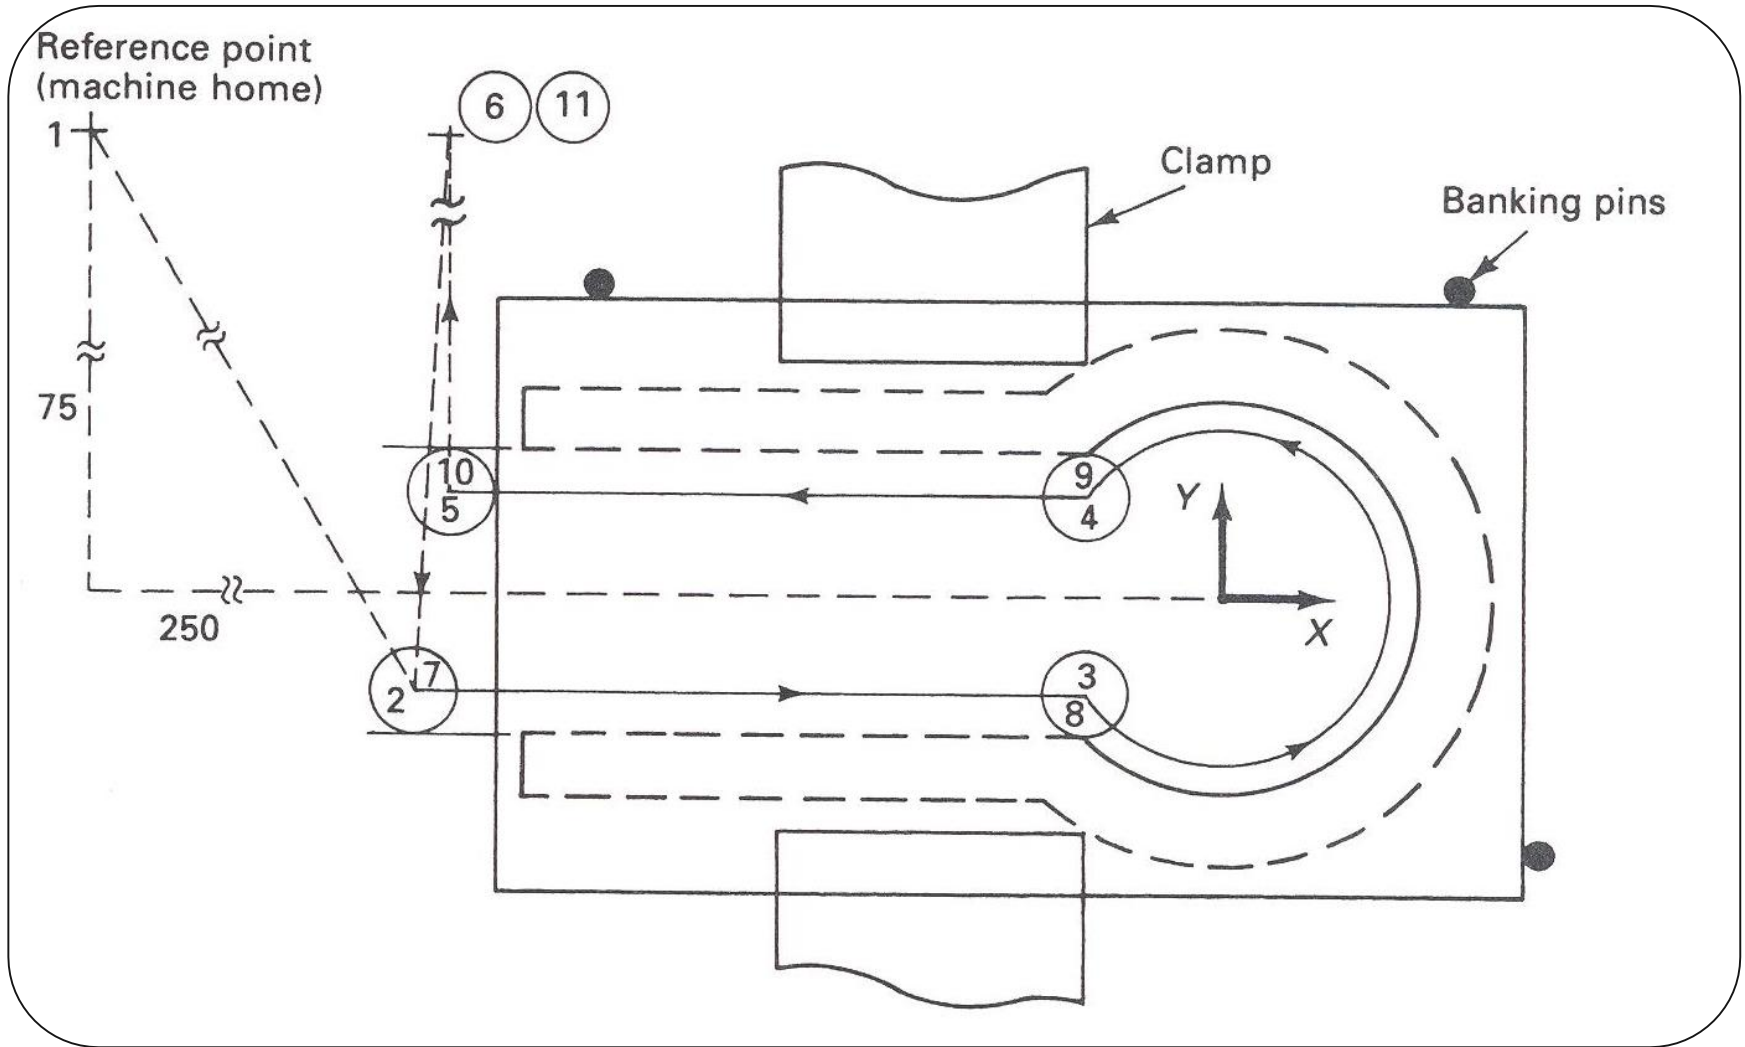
(a):Cutter path for milling the inside of the part the part of Fig. 6
